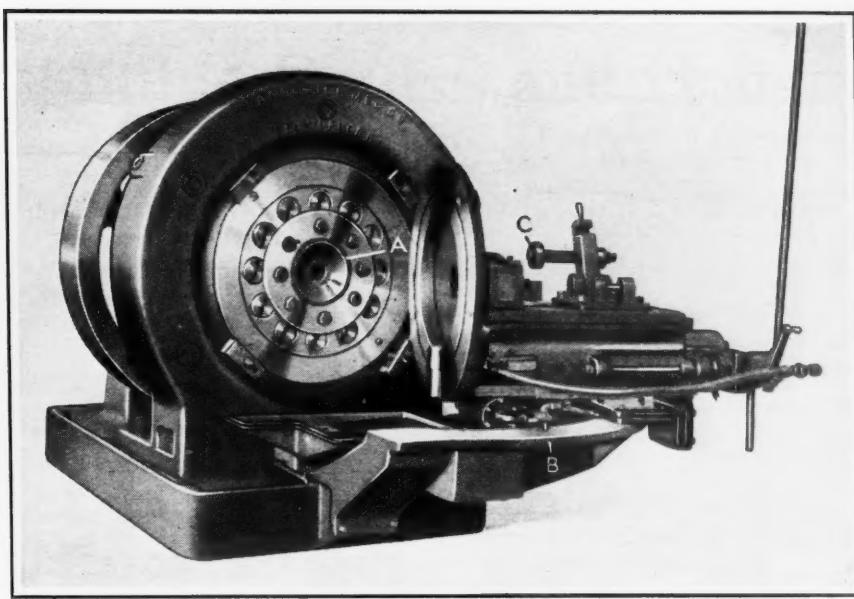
View of the Machine shown in Fig. 7 with the Roll Cover and Attached Feeding and Holding Devices swung back
